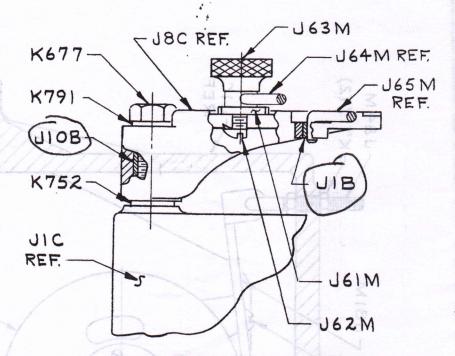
DETAIL 'C' MOTOR MOUNTING ASSY.
